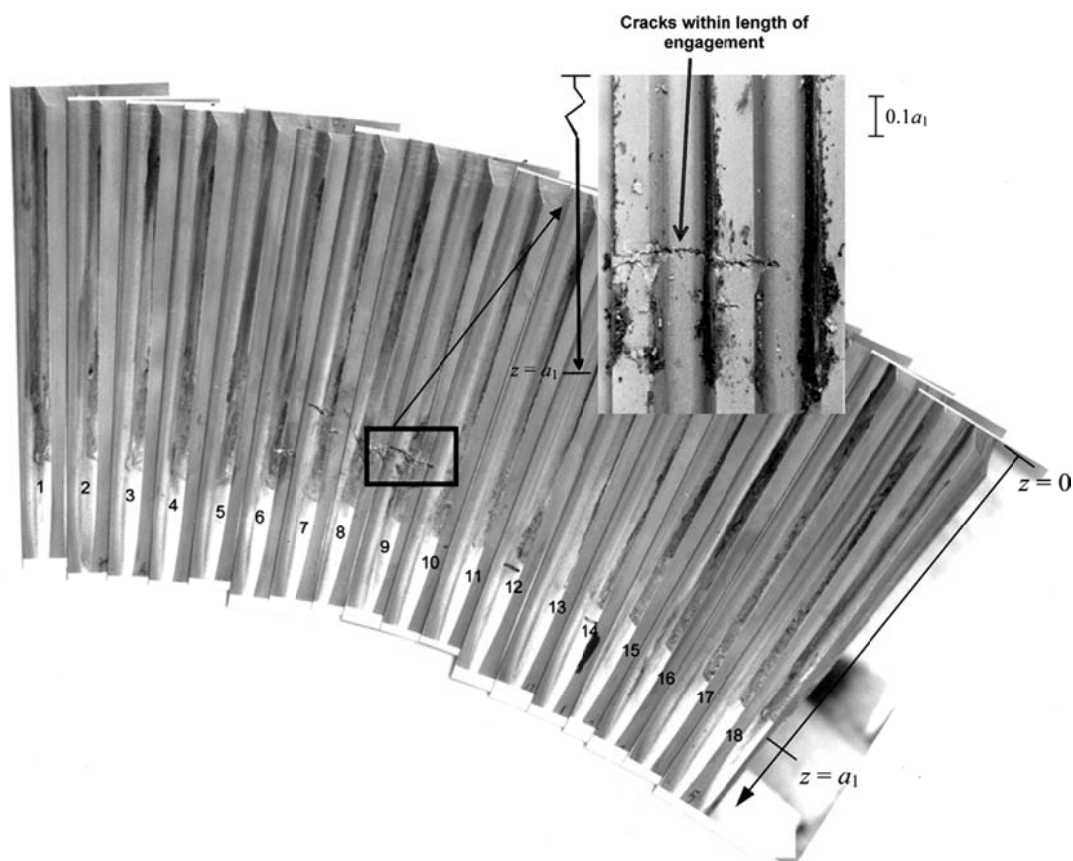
Fretting fatigue cracks near the start of engagement along axial direction of involute spline shaft-hub connection [Din-07]
